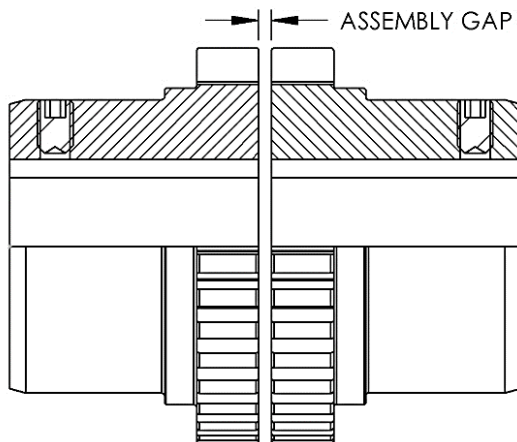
TAPER GRID ASSEMBLY GAP
